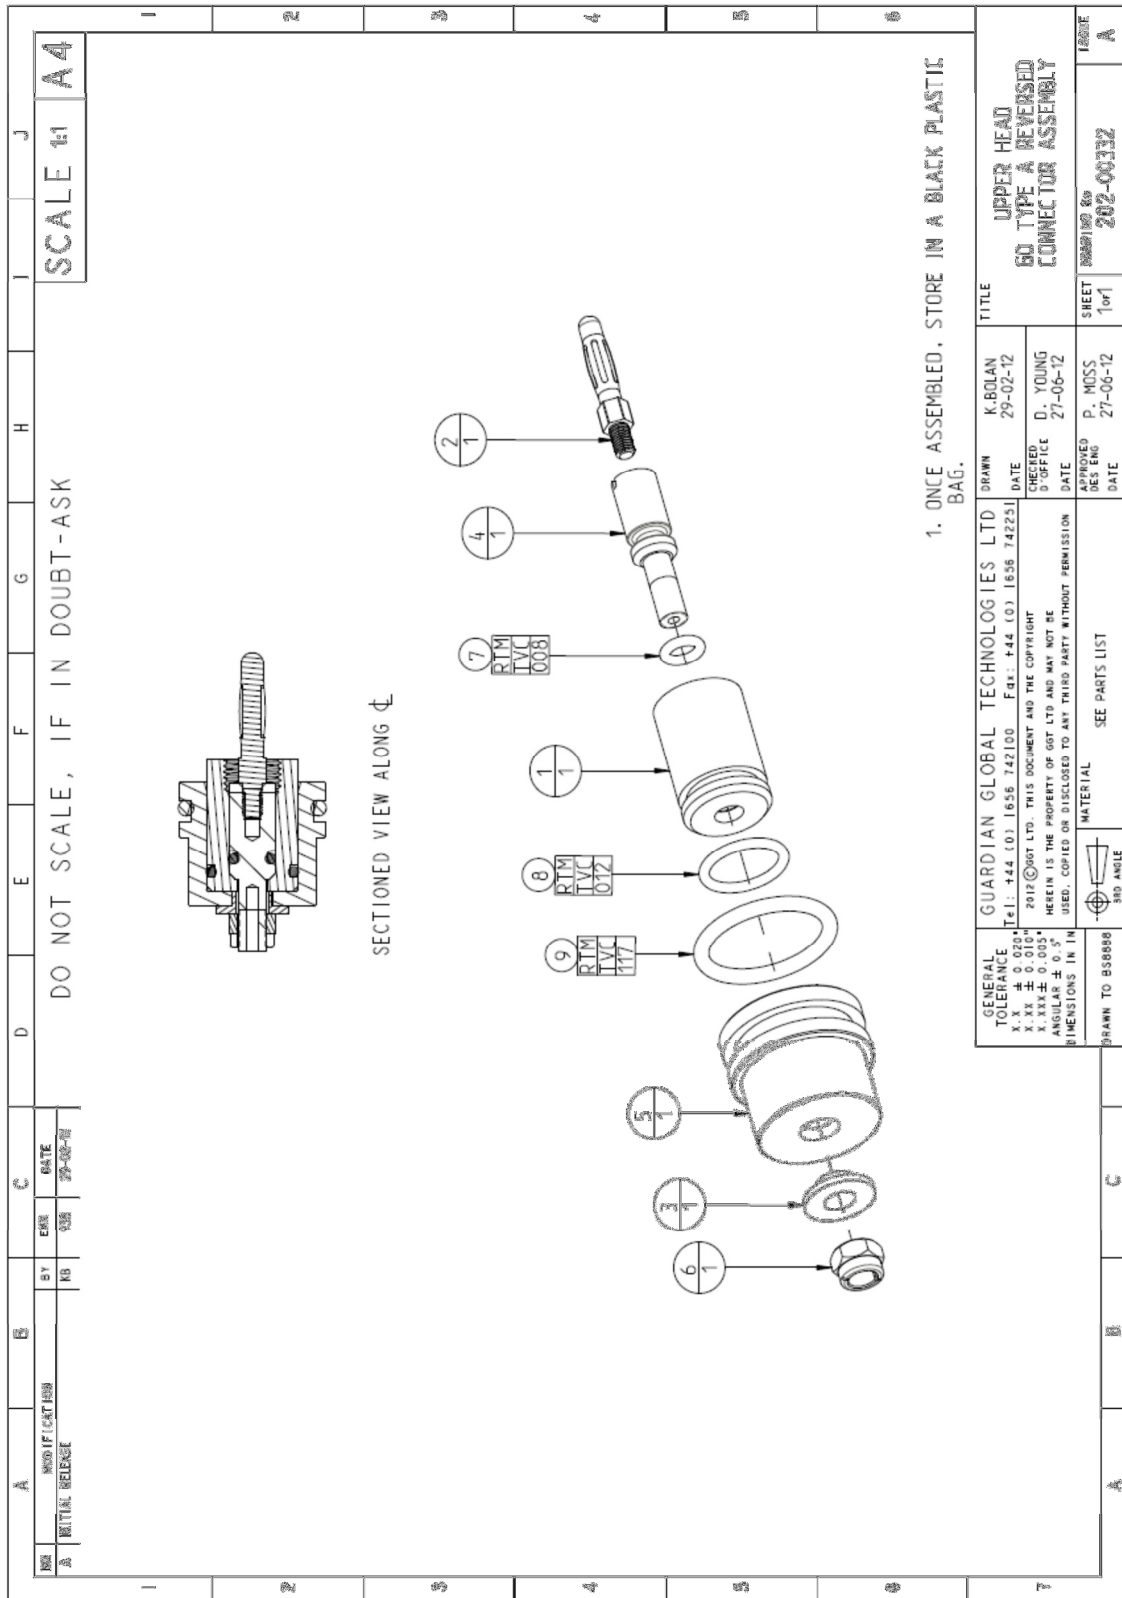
Upper Head GO Type A Reversed Connector Assembly Drawing, 202-00332-A
